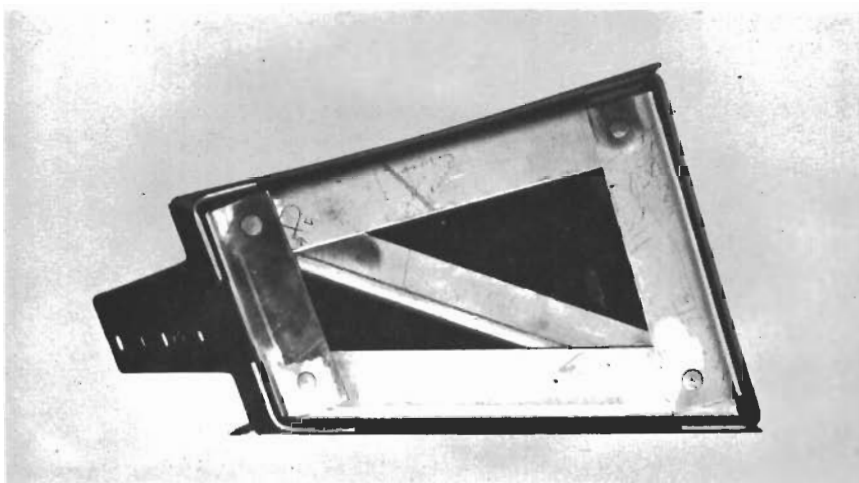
ASSEMBLED 1.5-INCH RADIUS LEADING EDGE
